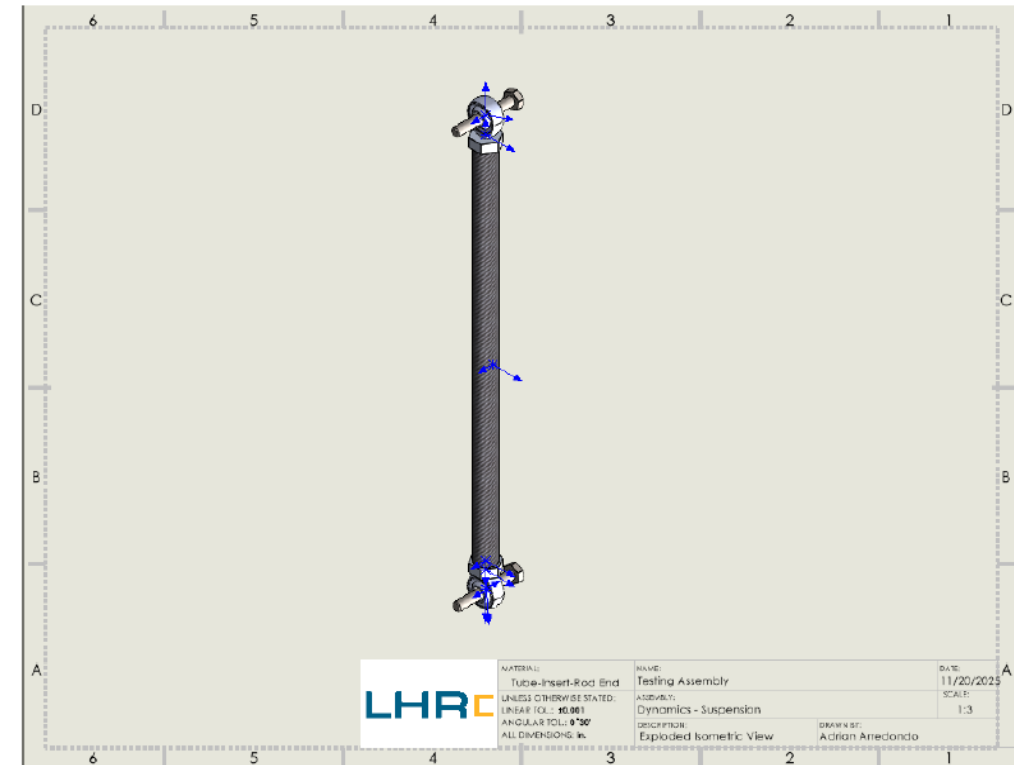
Carbon Fiber Control Arm Assembly Cad Drawing
